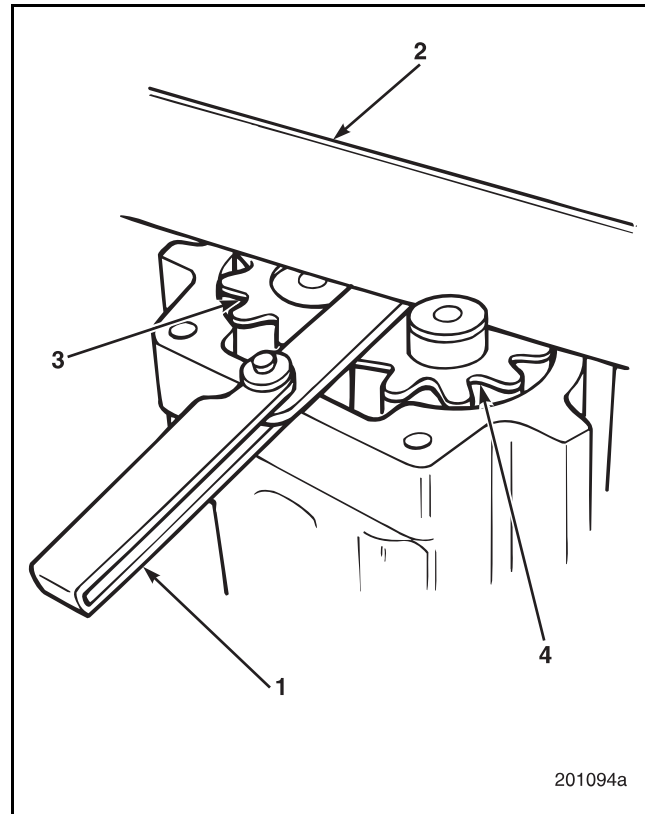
Oil Pump Driving/Idler Gear Assembly End Clearance Check
